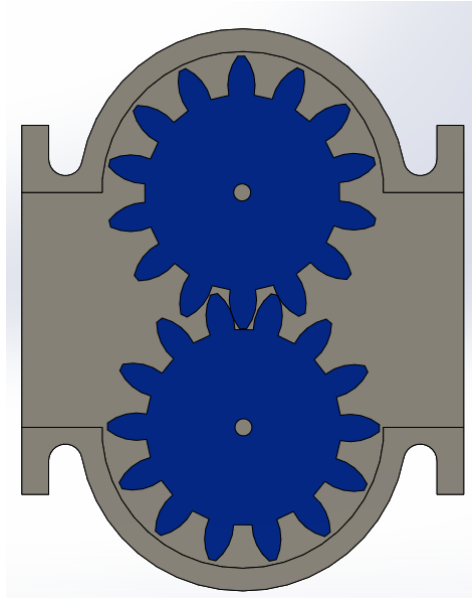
External gear pump. Fluid is compressed when it revolves around outer perimeter of gears.
